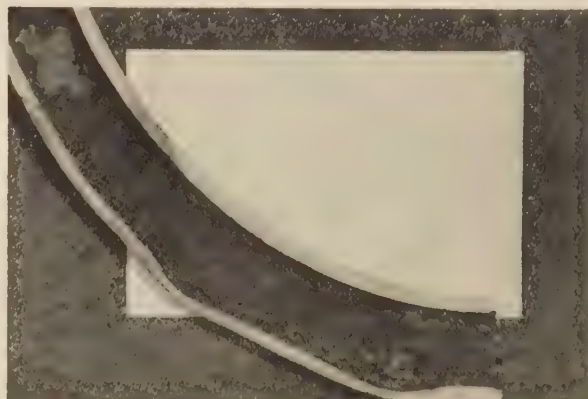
SECTIONED LOWER BEND—SOUTH TUBE AFTER 60-DAY RUN
